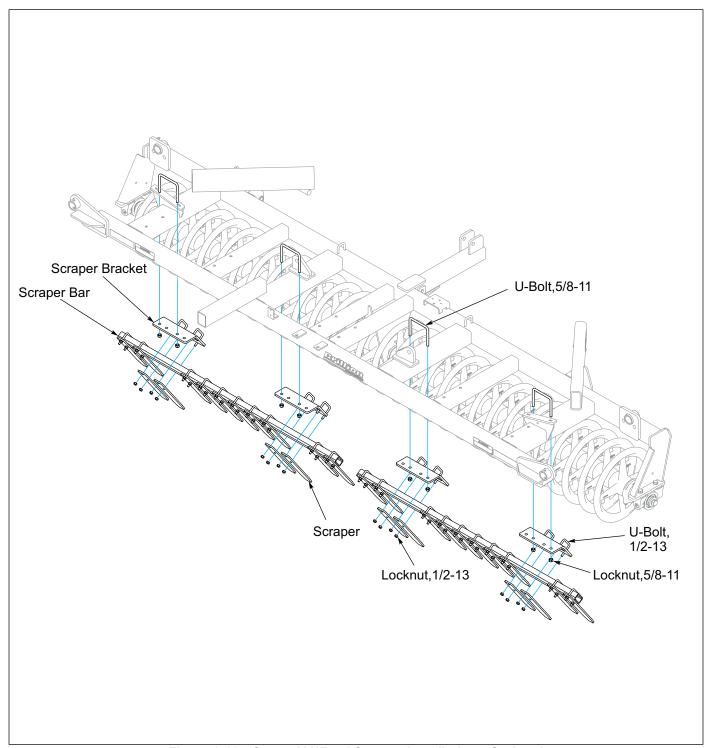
Center V-Wheel Scraper Installation - Optional
